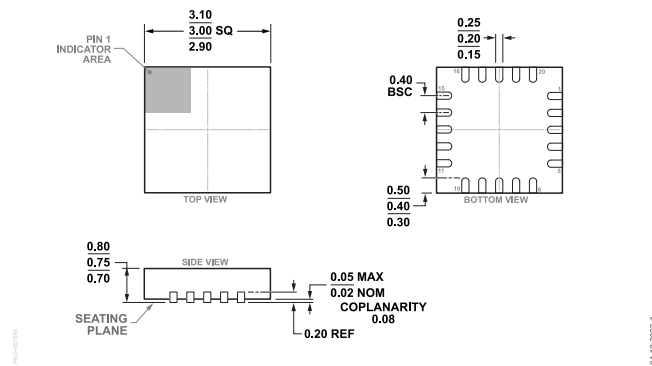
20-Lead Lead Frame Chip Scale Package [LFCSP] 3 x 3 mm Body and 0.85 mm Package Height (CP-20-23)
